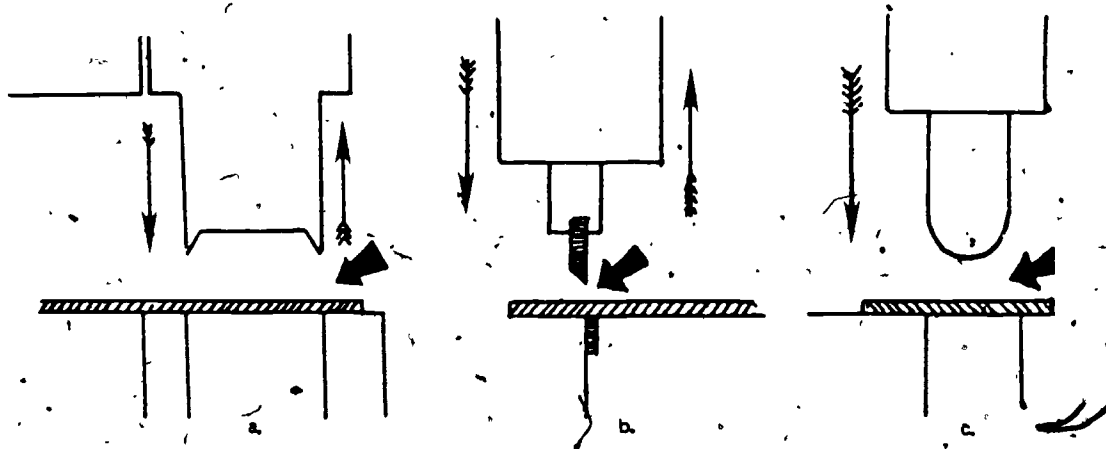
Machine motions of (a) punching, (b) shearing, and (c) bending can cause safety hazards.
